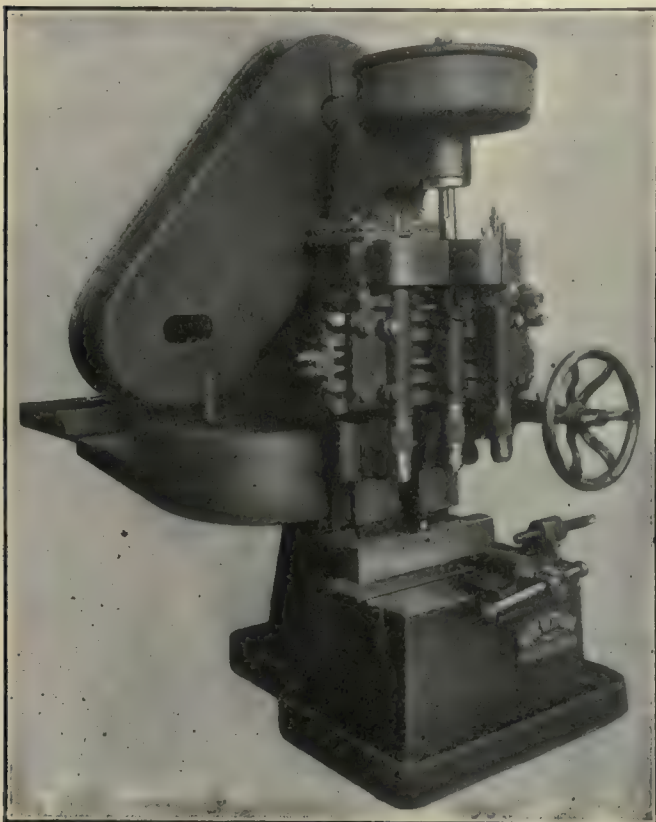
No. 3 punch press. Weight 1800 lb.; weight of flywheel, 370 lb.; size of flywheel, 26 x 4 in.; speed of flywheel, 125 r.p.m.; round opening in bed, 7 in. in diameter; oblong opening in bed, 11 x 6 in.; opening through back, 11 in.; depth of throat, 5½ in.; die space on top of bolster plate with stroke down and adjustment up, 6½ in.; distance from bed to gibs, 8½ in.; standard stroke, 2 in.; adjustment of slide, 2 in.; thickness of bolster plate, 1½ in.; square hole in slide for punch-holder shanks, 2 in.; floor space over all, 36 x 38 in.; bolster plate, 14 x 21 in.; face slide, 7 x 7½ in.
